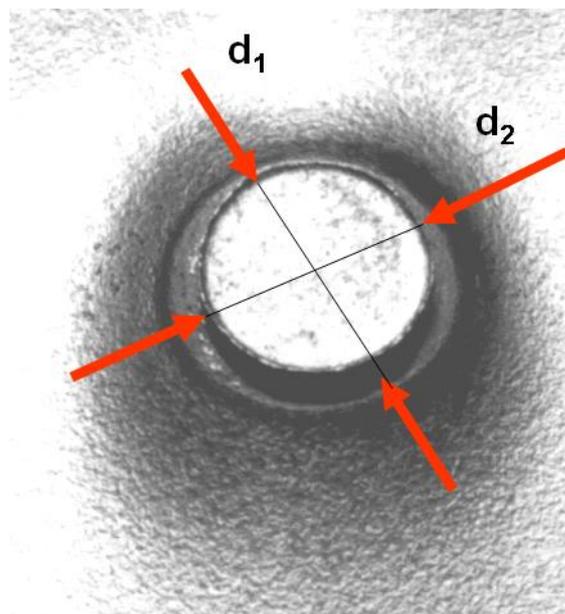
Measurement of a spot weld. Source: TWI
